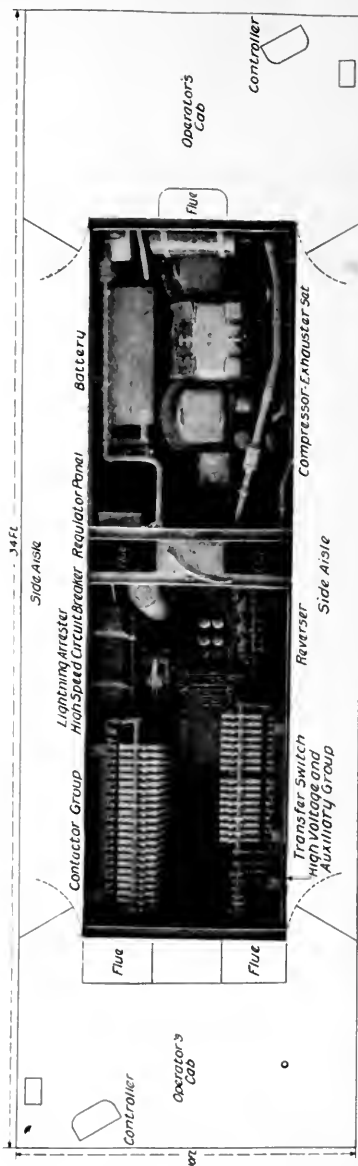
View of Arrangement of Apparatus in Locomotive Looking Down with Hatches Removed
